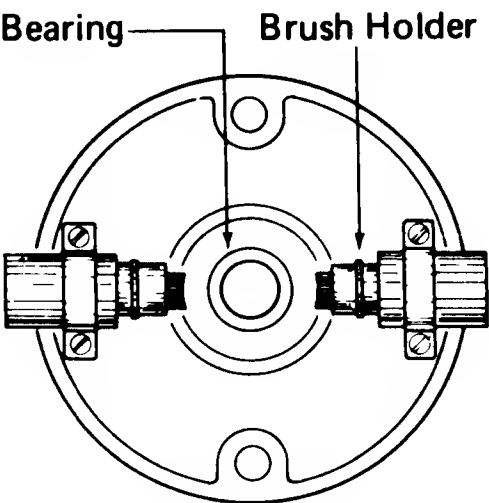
A universal motor. (*The Dumore Co.*)
